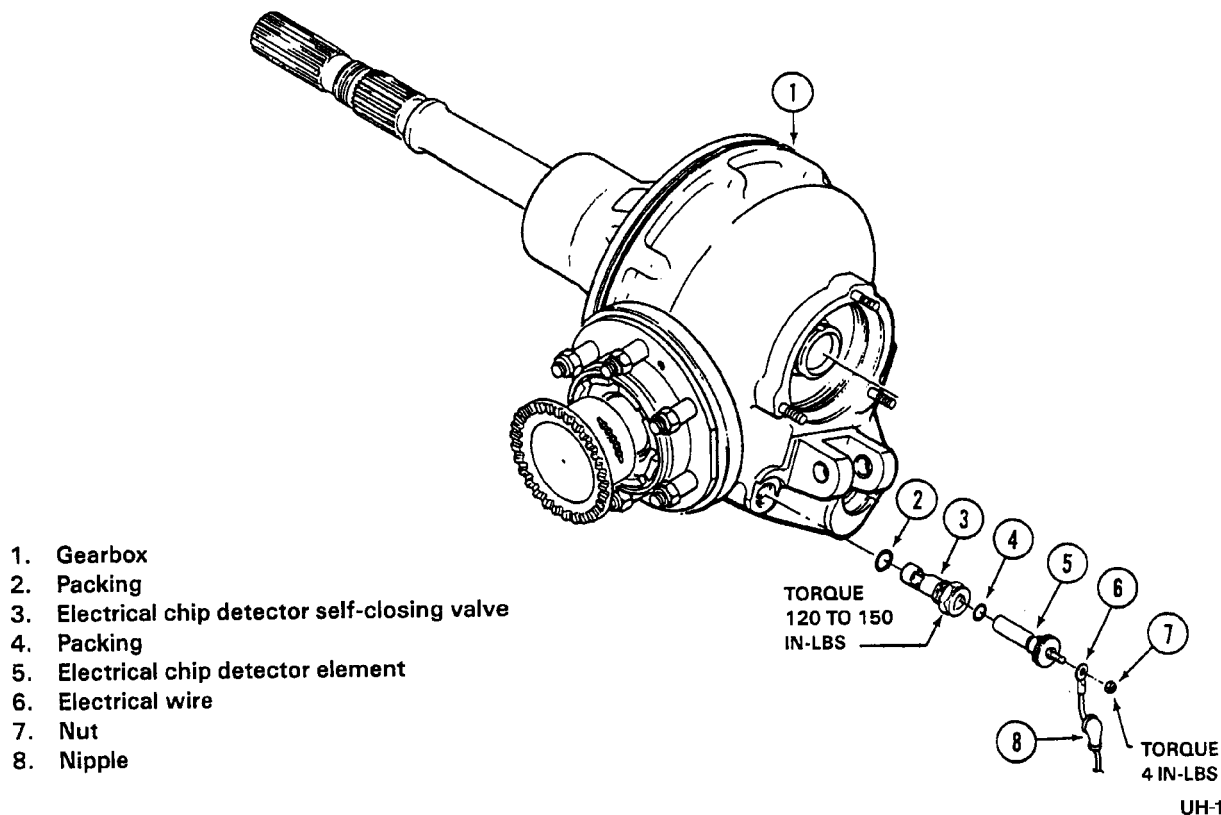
Tail rotor gearbox electrical chip detector installation
